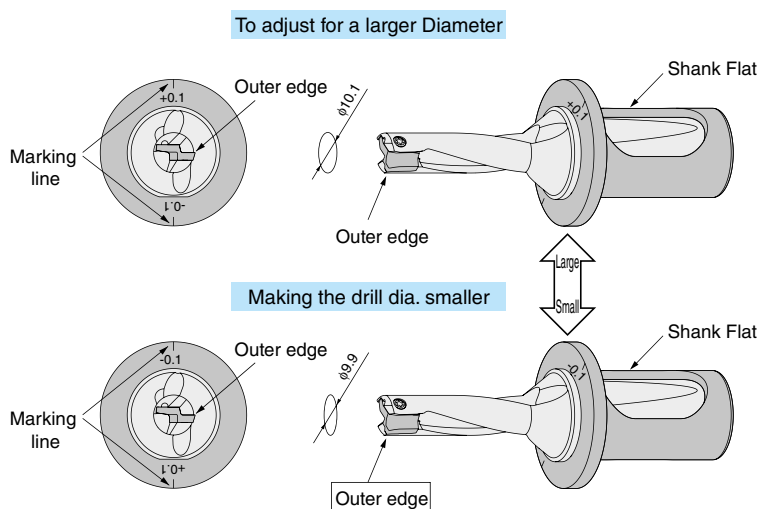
Diameter Adjustment Method (e.g.) φ10 Drill
